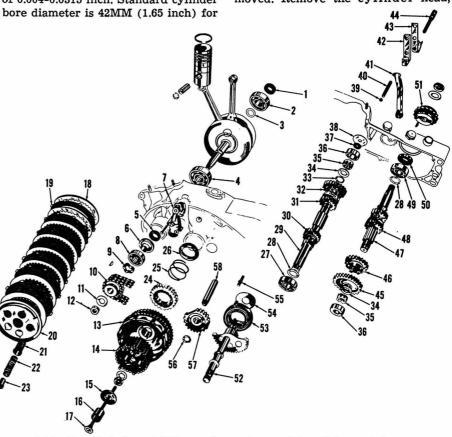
Exploded view of 250cc engine and transmission. Other models are similar. Shift mechanism is shown in Fig. A3-11.
